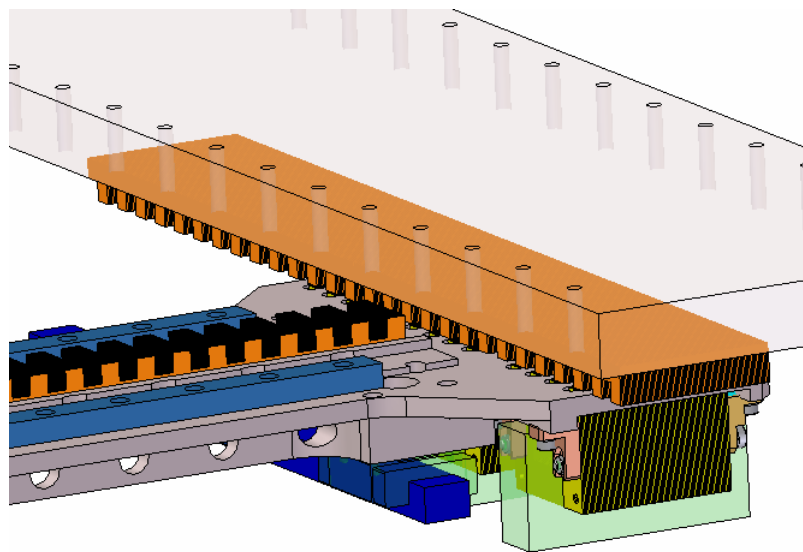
Static track mounted above the moving platform in the end supported type motor.
